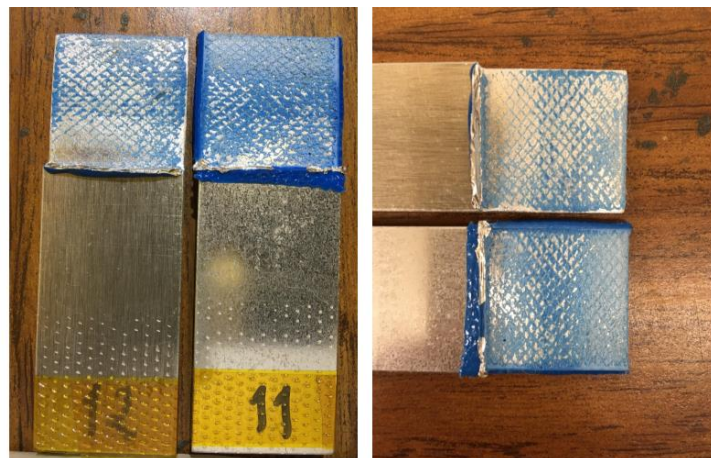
S6-11-12-W- Fracture Surface
